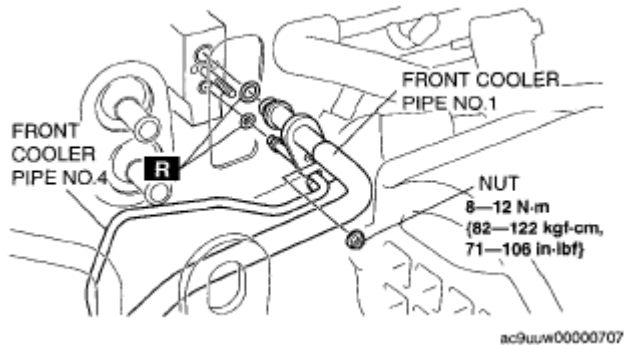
Identifying Front Cooler Pipe No.1 Bracket Installation Nut & Torque Specifications
